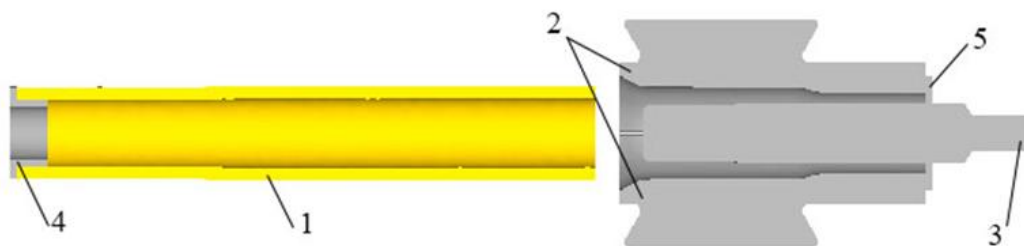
The scheme of the suggested forging process on LRFM: 1 –billet; 2 – forging dies; 3 – mandrel; 4 –object for the feeding device; 5 – thrust collar
